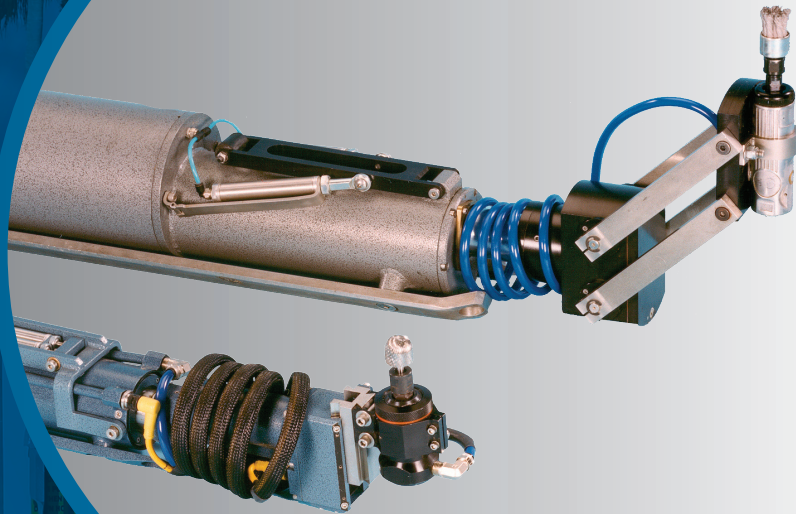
A: ASSEMBLY CUTTER, GIANT KANGAROO, GK400
